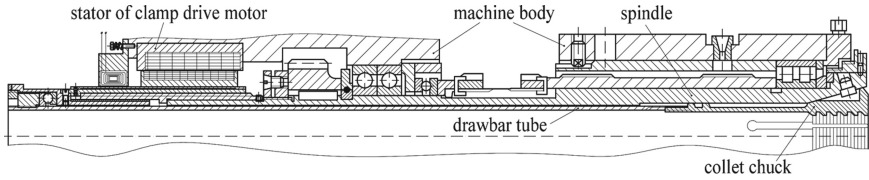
The automatic clamping mechanism with the proposed drive and collet chuck as a part of the spindle unit of the lathe.
